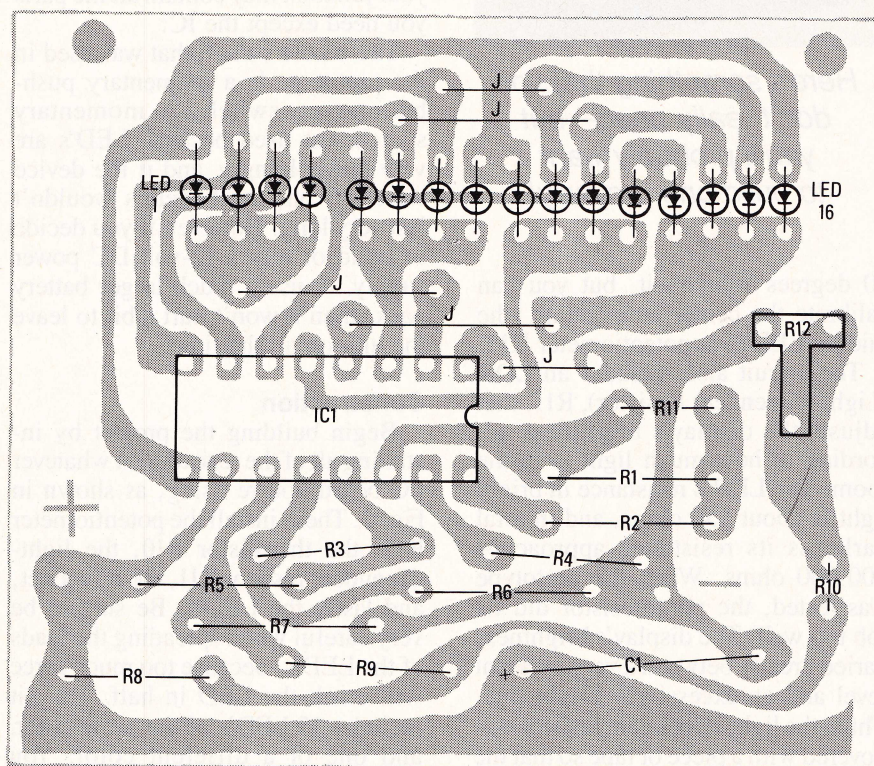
PARTS-PLACEMENT DIAGRAM. Follow this when soldering the parts on the board supplied with the kit, or the one you can make from the pattern in PC Service.
